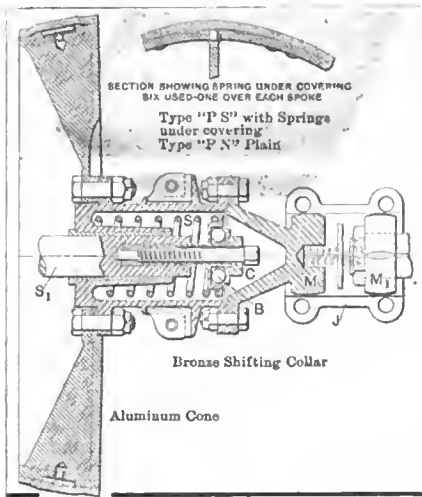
Leather-faced clutch with means for adjusting the pressure of the spring at will
